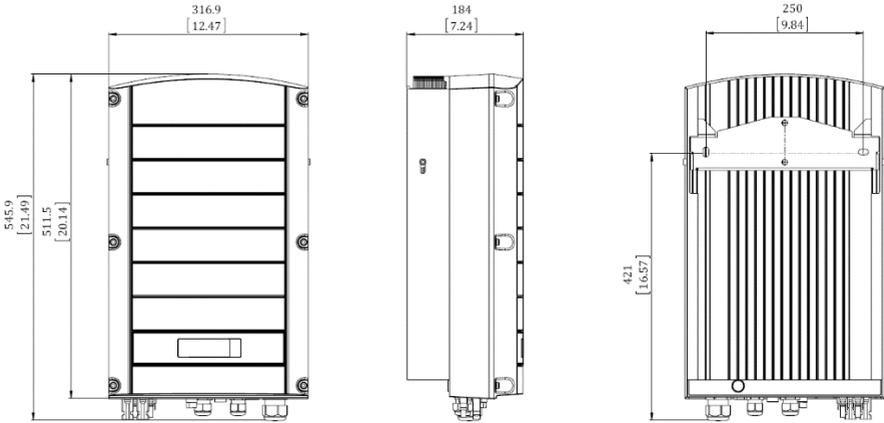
single-phase inverter with a media type 2 - view of front, side and rear
